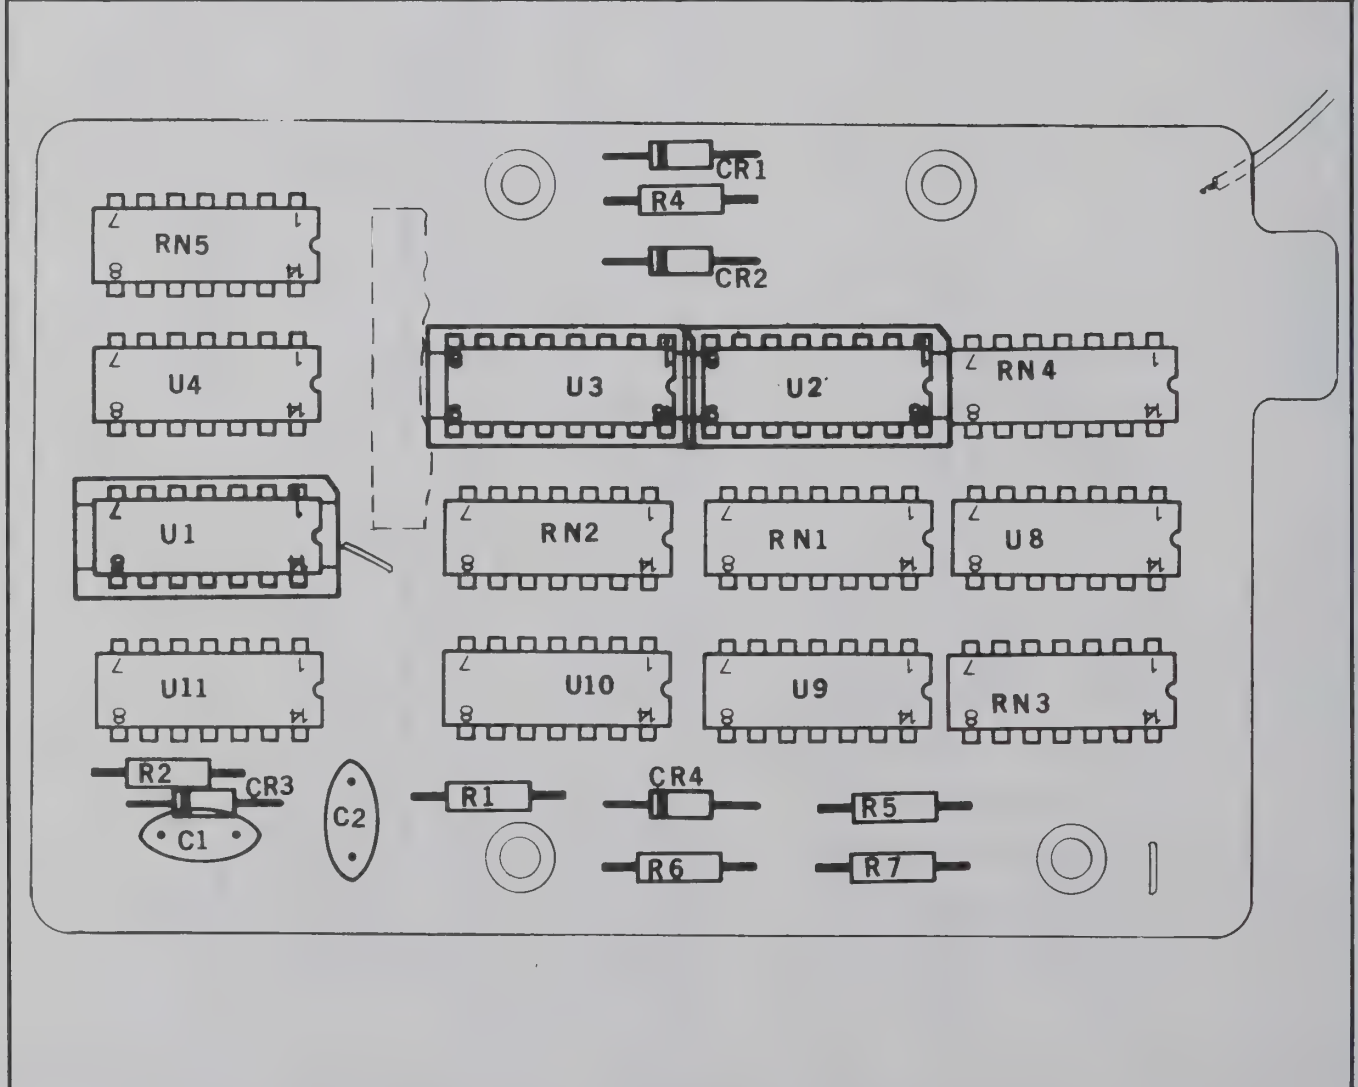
DPOU PCB ASSEMBLY, OPTION -02
